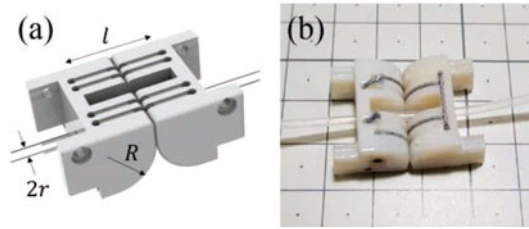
Rolling contact joint unit with embedded air tube: (a) schematic view and (b) assembled joint unit.
